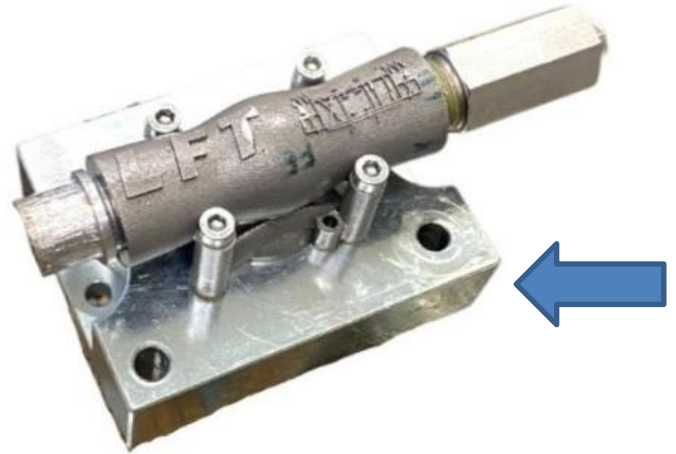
Conventionally manufactured (CM) base plate with spool valve attached.
